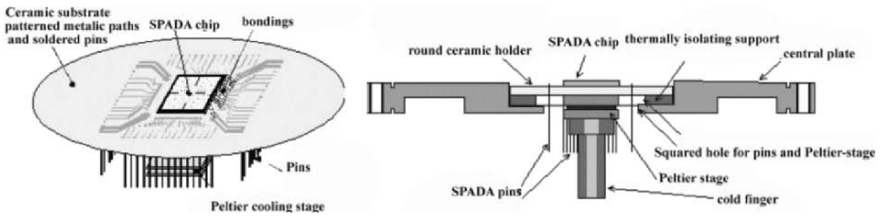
(left) A SPADA chip assembled on a ceramic holder and on the Peltier stage. (right) Cross-section of the mounting of the on the central plate of the housing.
